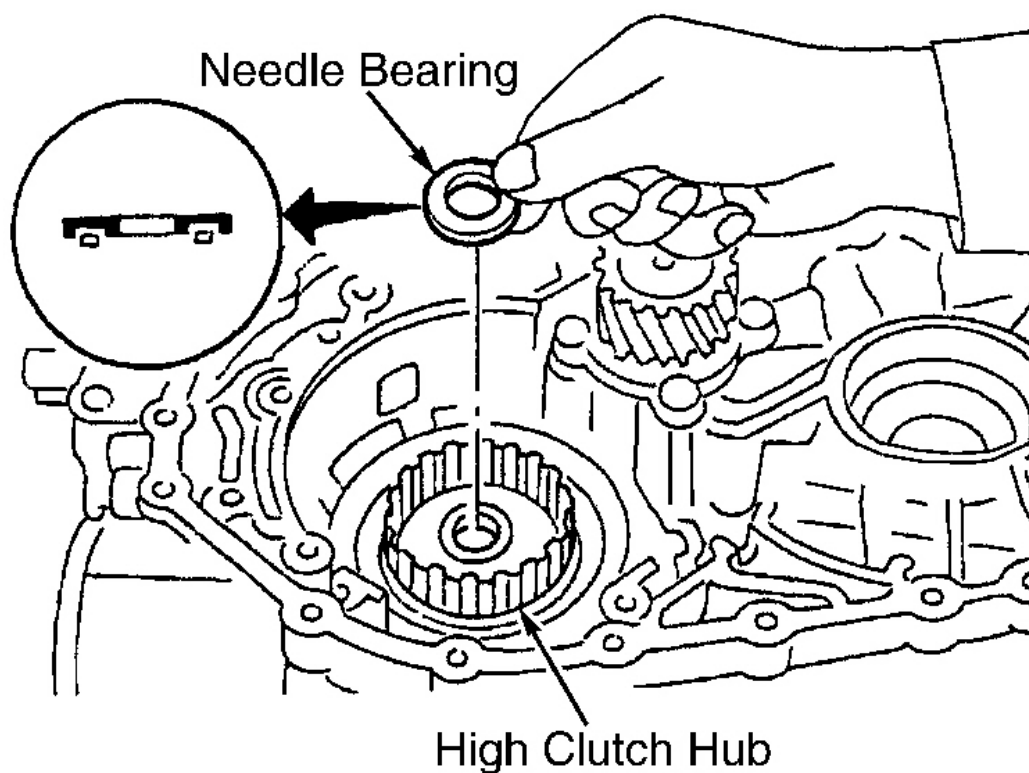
Identifying Front Sun Gear-To-High Clutch Thrust Needle Bearing Location
